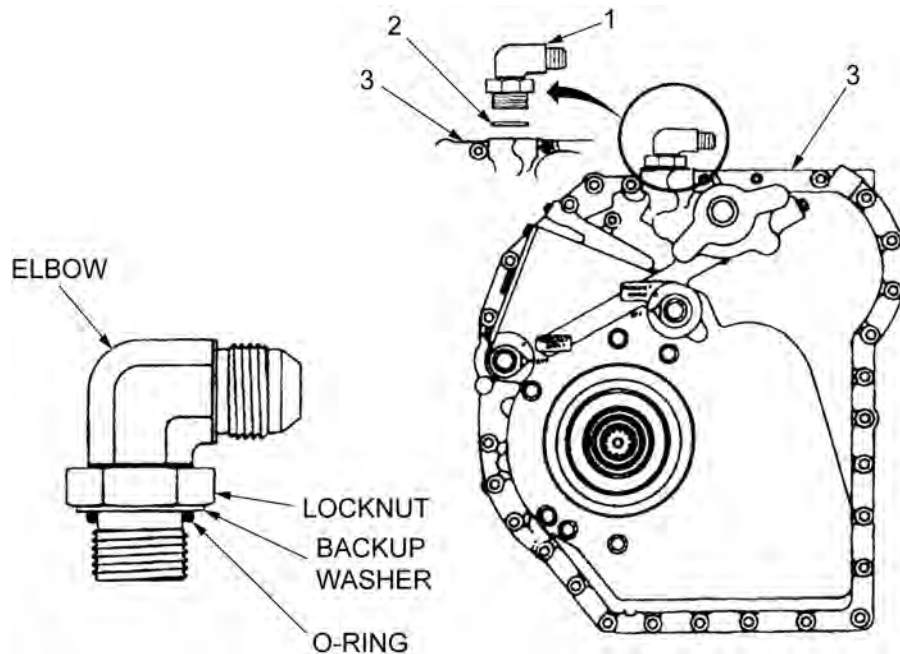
Backup Washer Inspection and O-Ring Installation.
